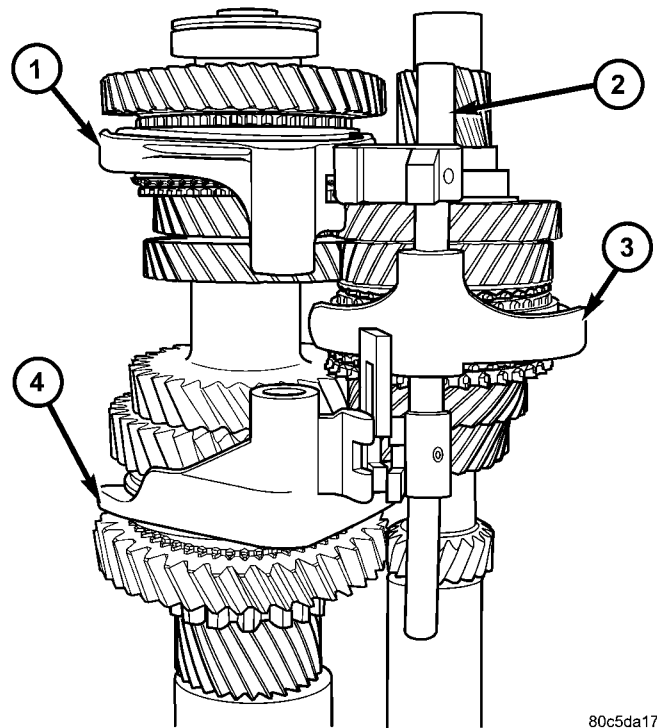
1/2-5/R Shift Rail Removal/Installation
